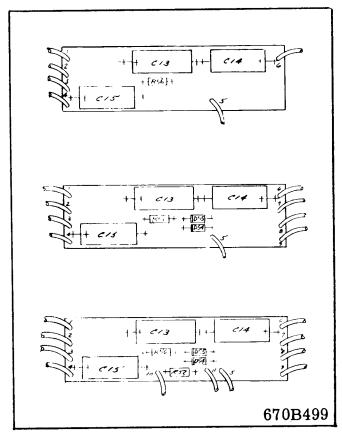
Printed Circuit Board Assembly for SDG, SDG-1, 2, 3, & 4 Relays
